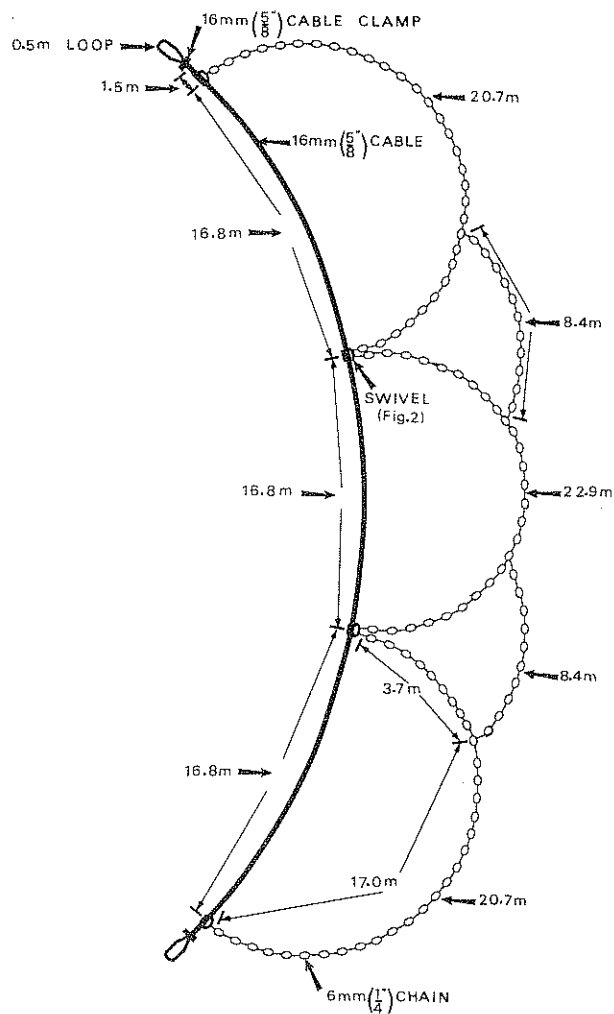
Dimensions of a 53-m-long cable-chain drag.
